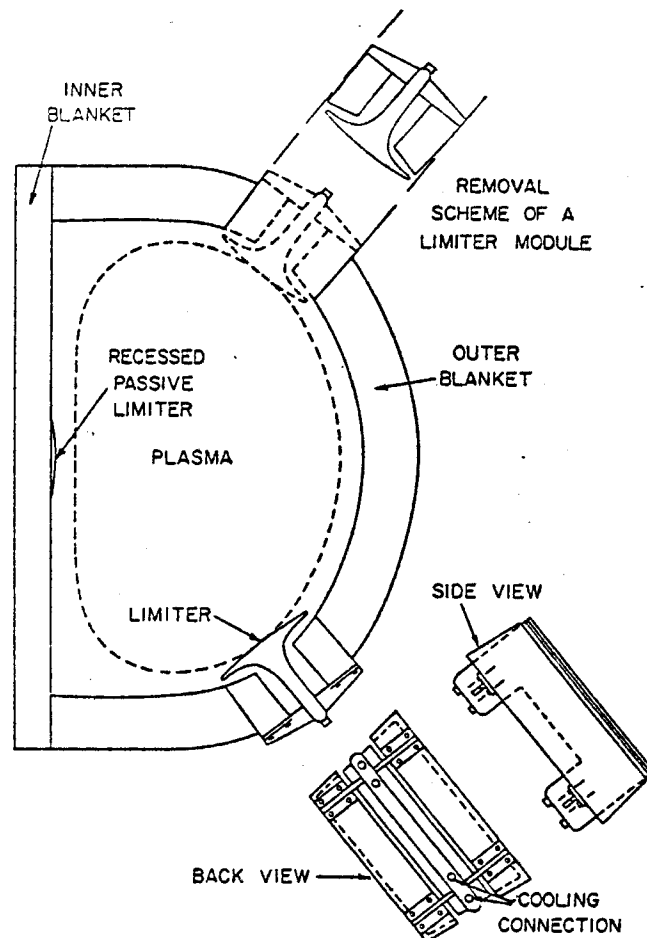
Illustration showing method for attachment and extraction of limiter modules.
